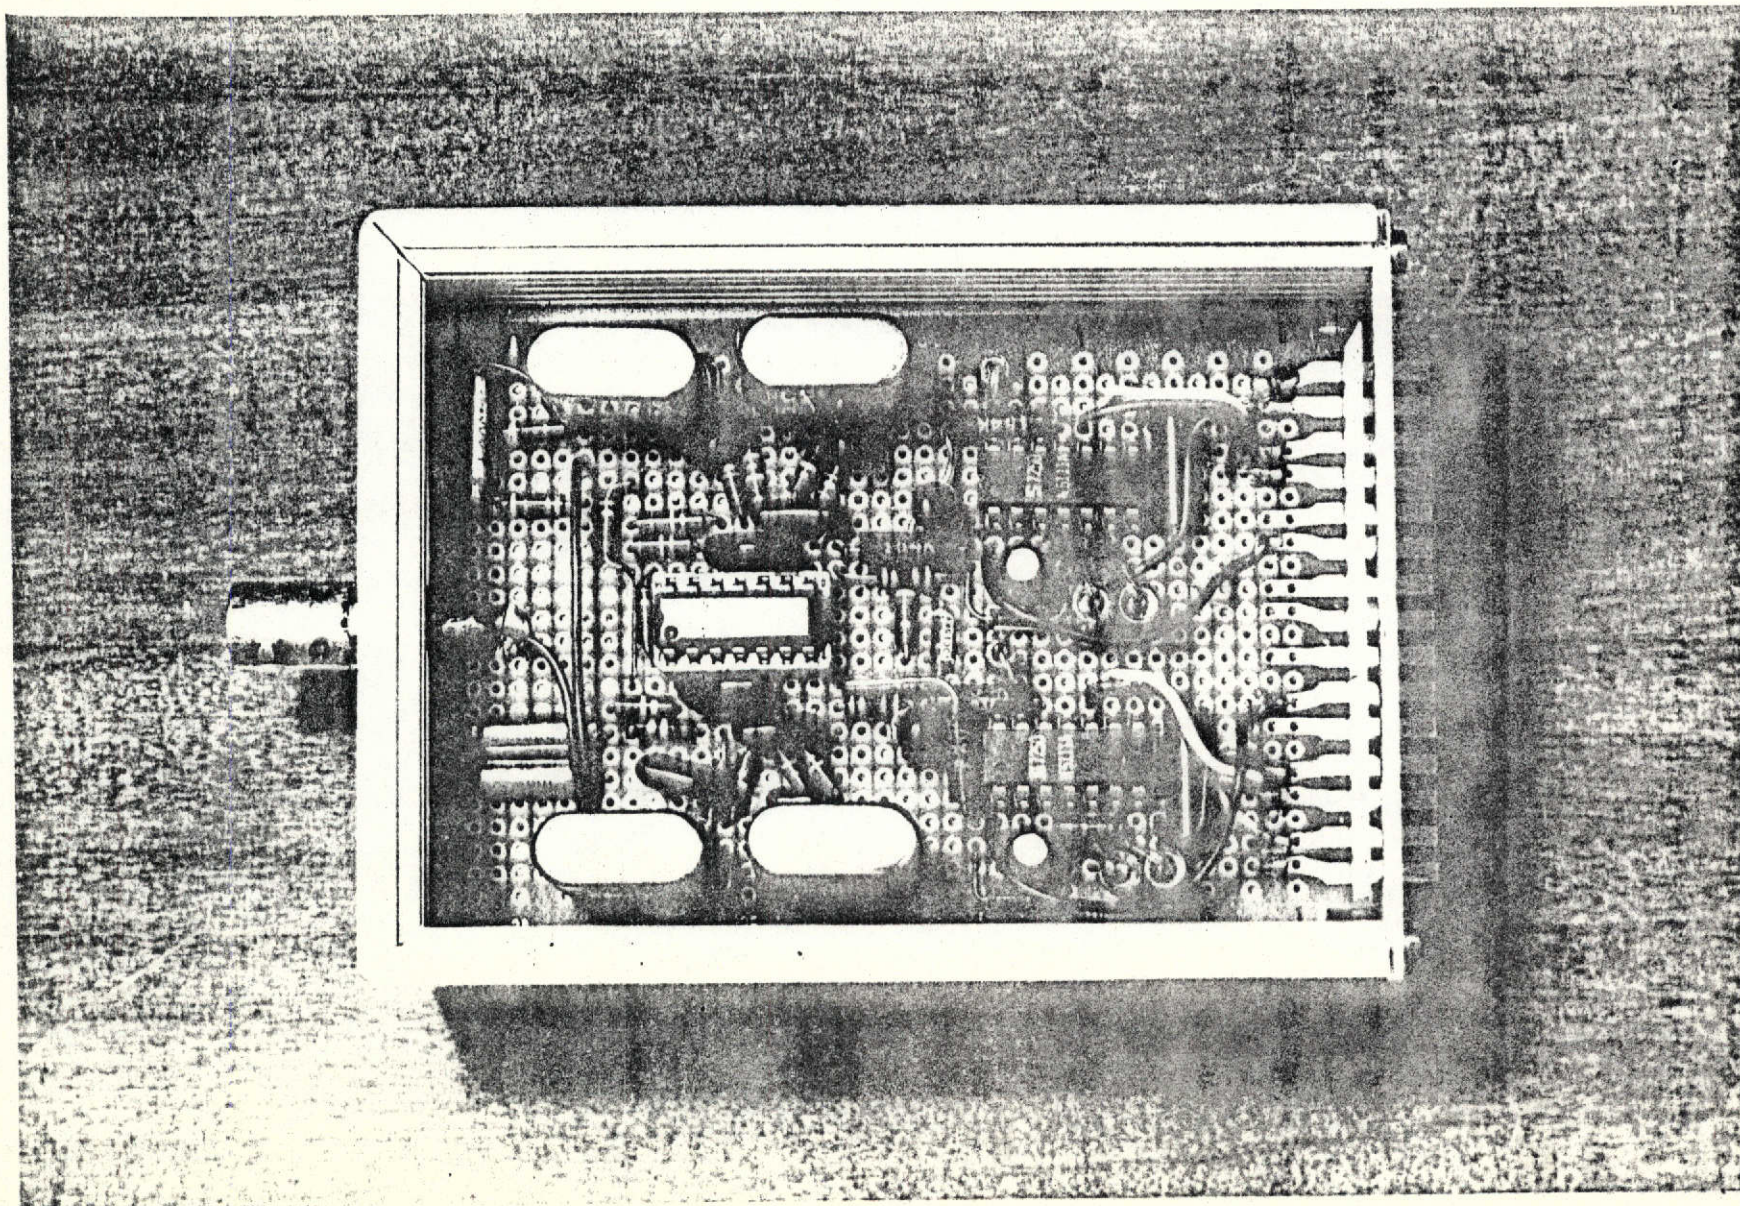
Photograph of Two Channel Filter-Limiter Assembly.
